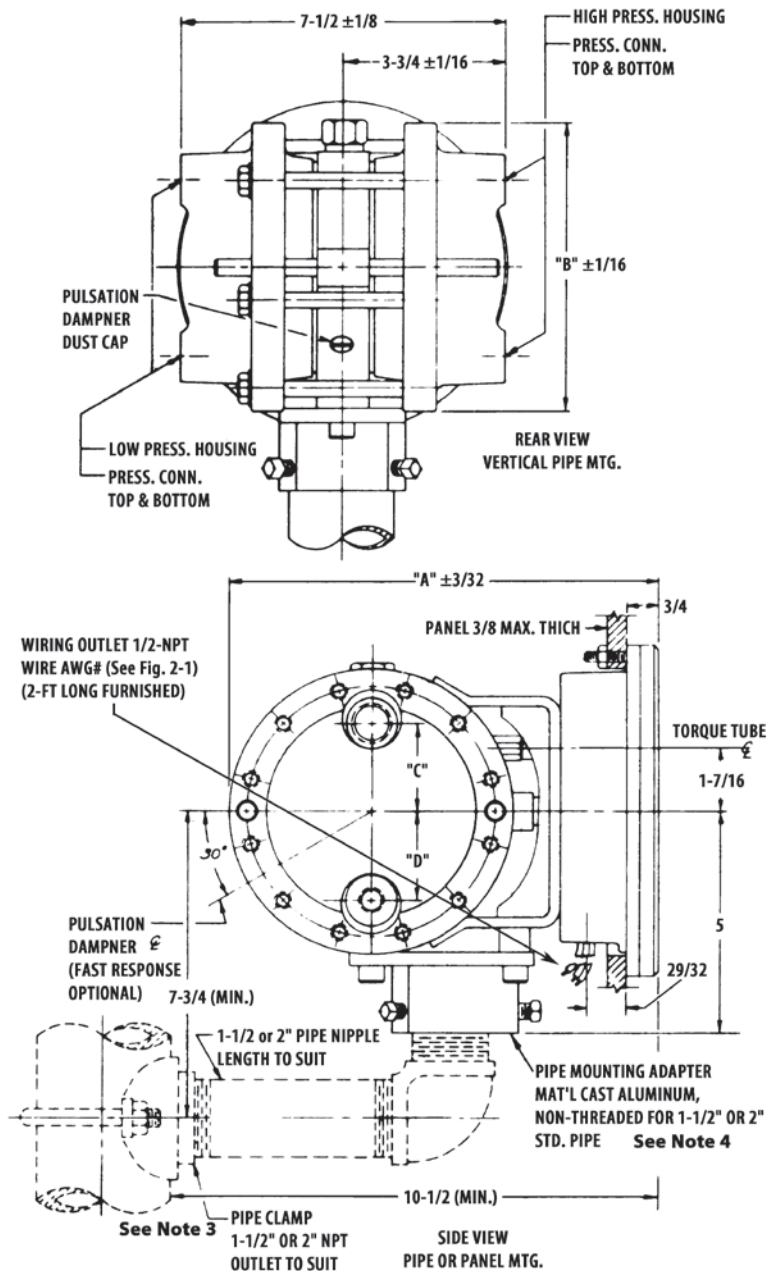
Model 289A Outside Dimensions (Part 1 of 2)
